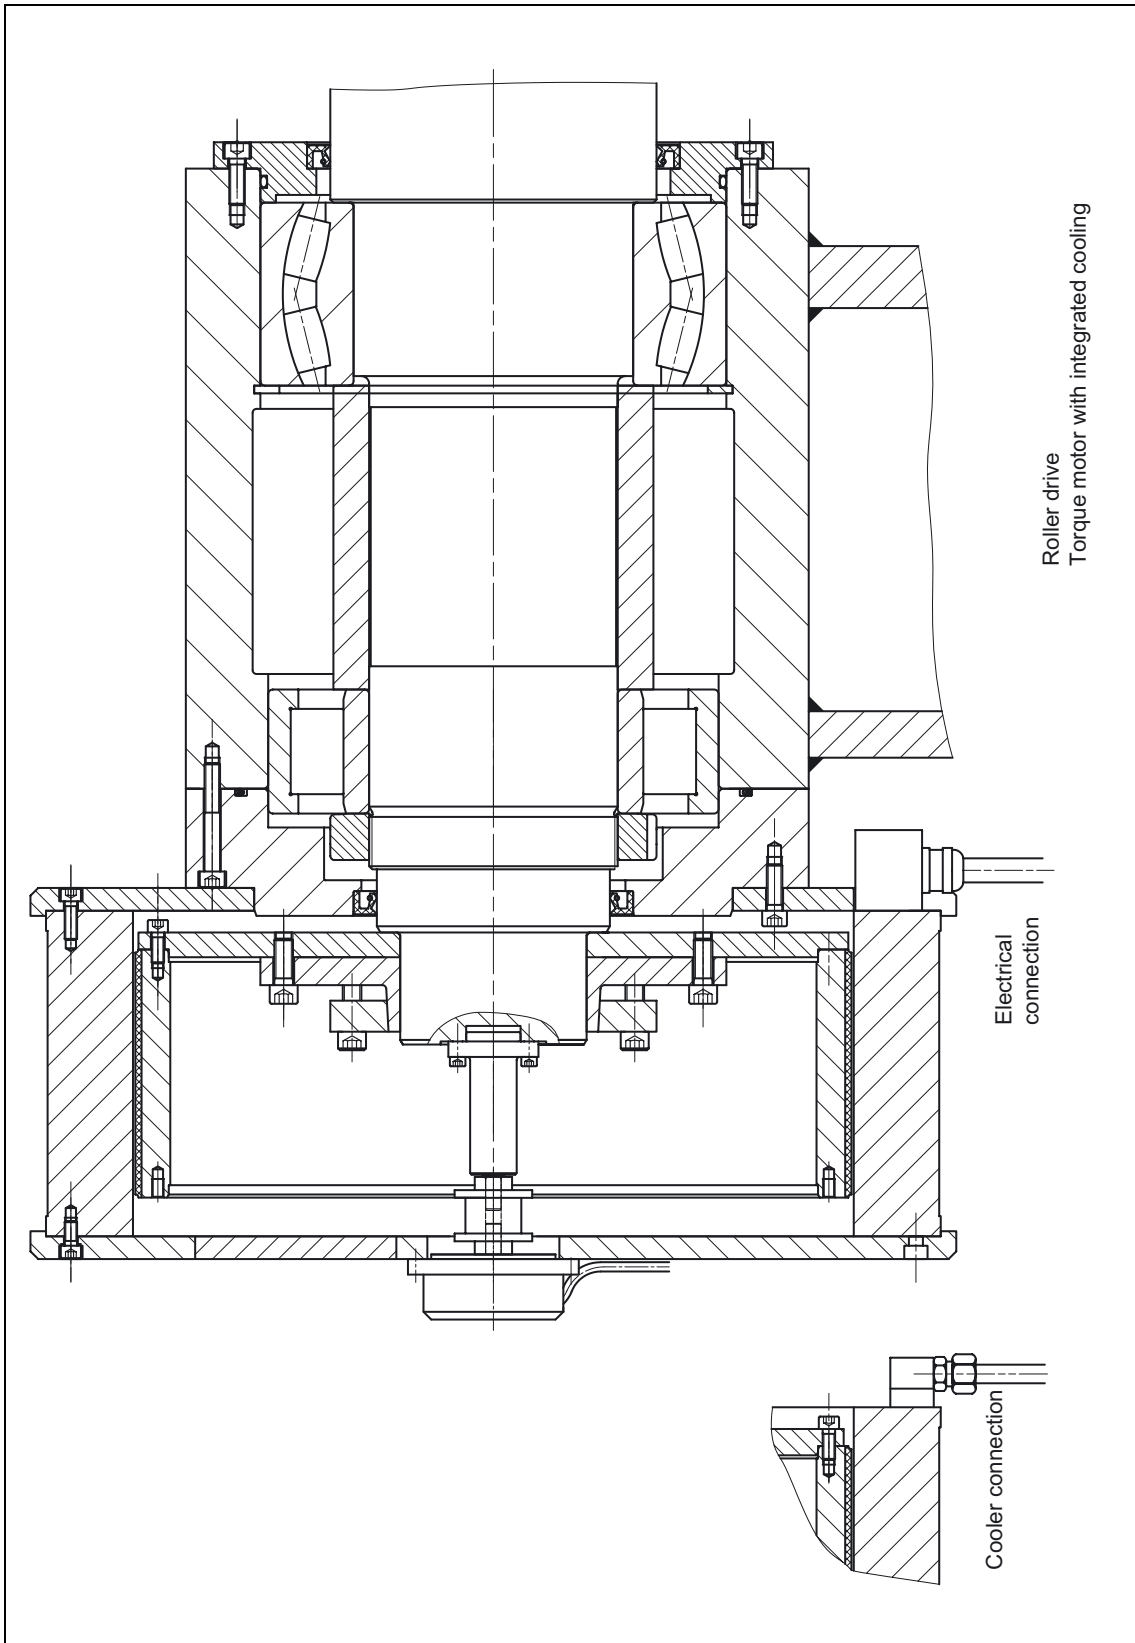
Roller drive with low shaft bend using a torque motor with integrated cooling
